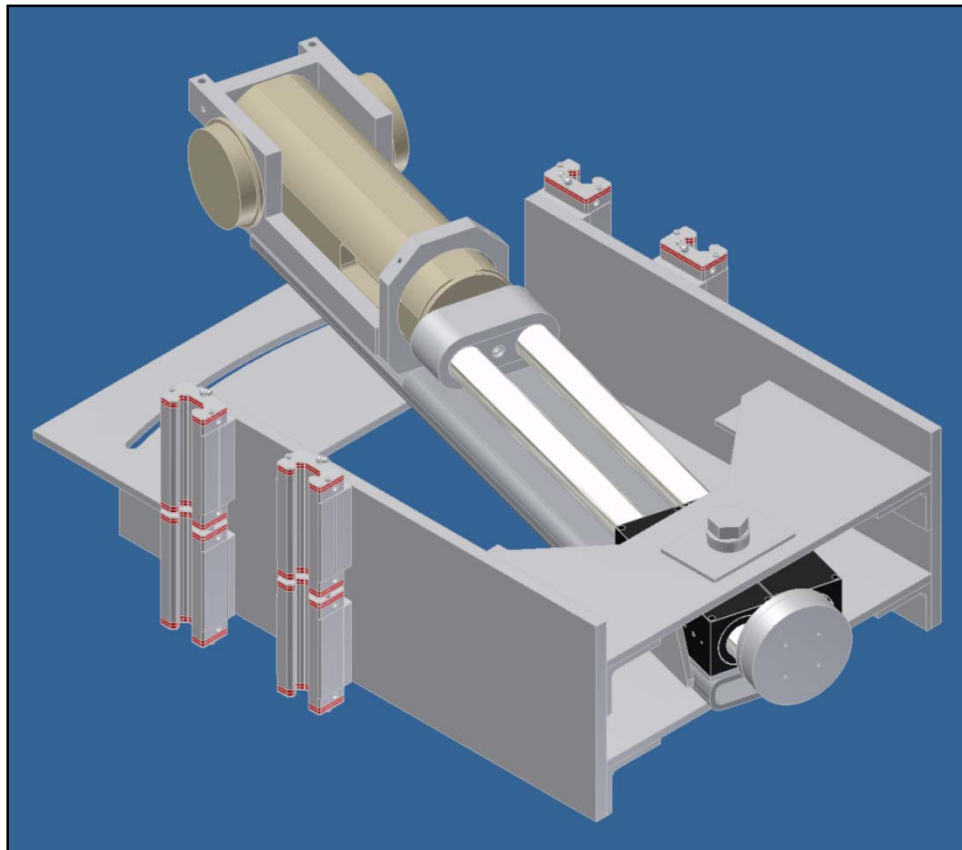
Carriage Assembly (Shown With Guide Blocks)
